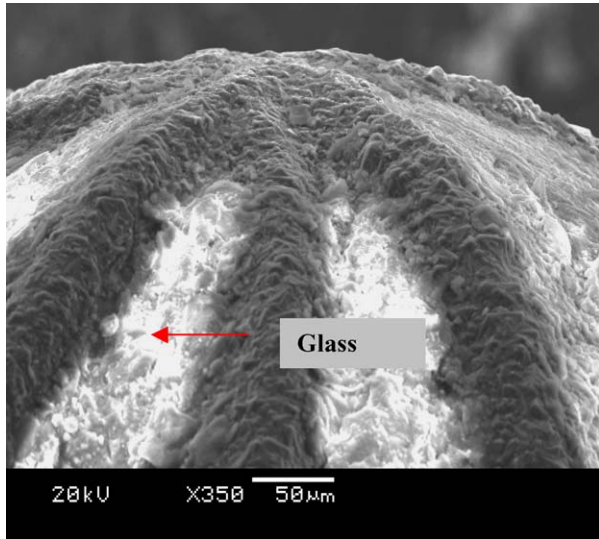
Cutting edge of dental bur after drilling borosilicate glass showing adhesion of glass on the flute of the bur.
